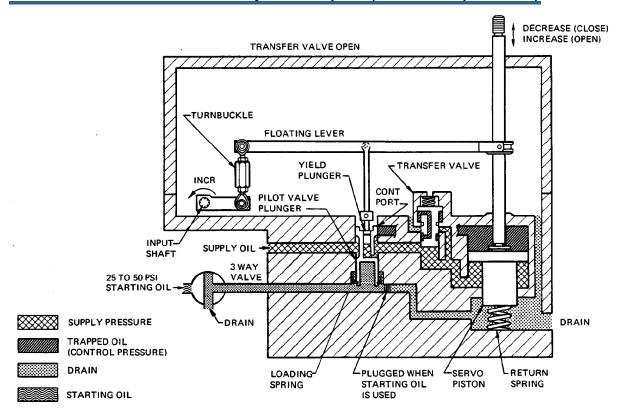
Schematic of Mechanical-Hydraulic Amplifier with Transfer Valve Open
